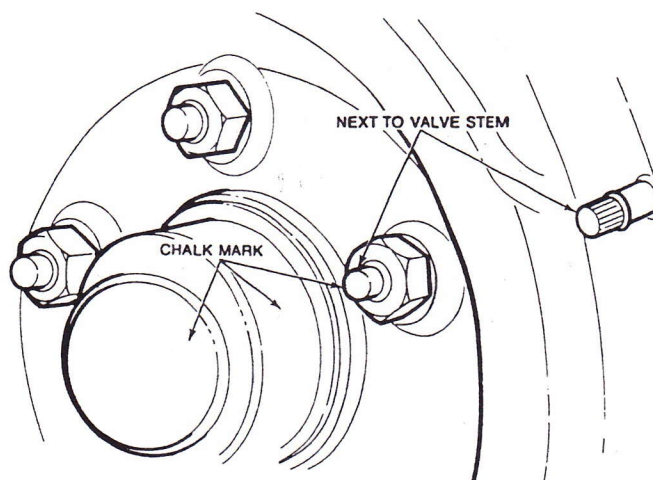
Indexing the Wheel. Mark each wheel with chalk or crayon to make sure balanced wheels are installed in same position. (Courtesy of Ford Motor Company)
